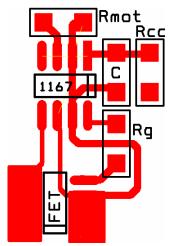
Single side board, SO8 MOSFET, OVT grounded, solder side view.
